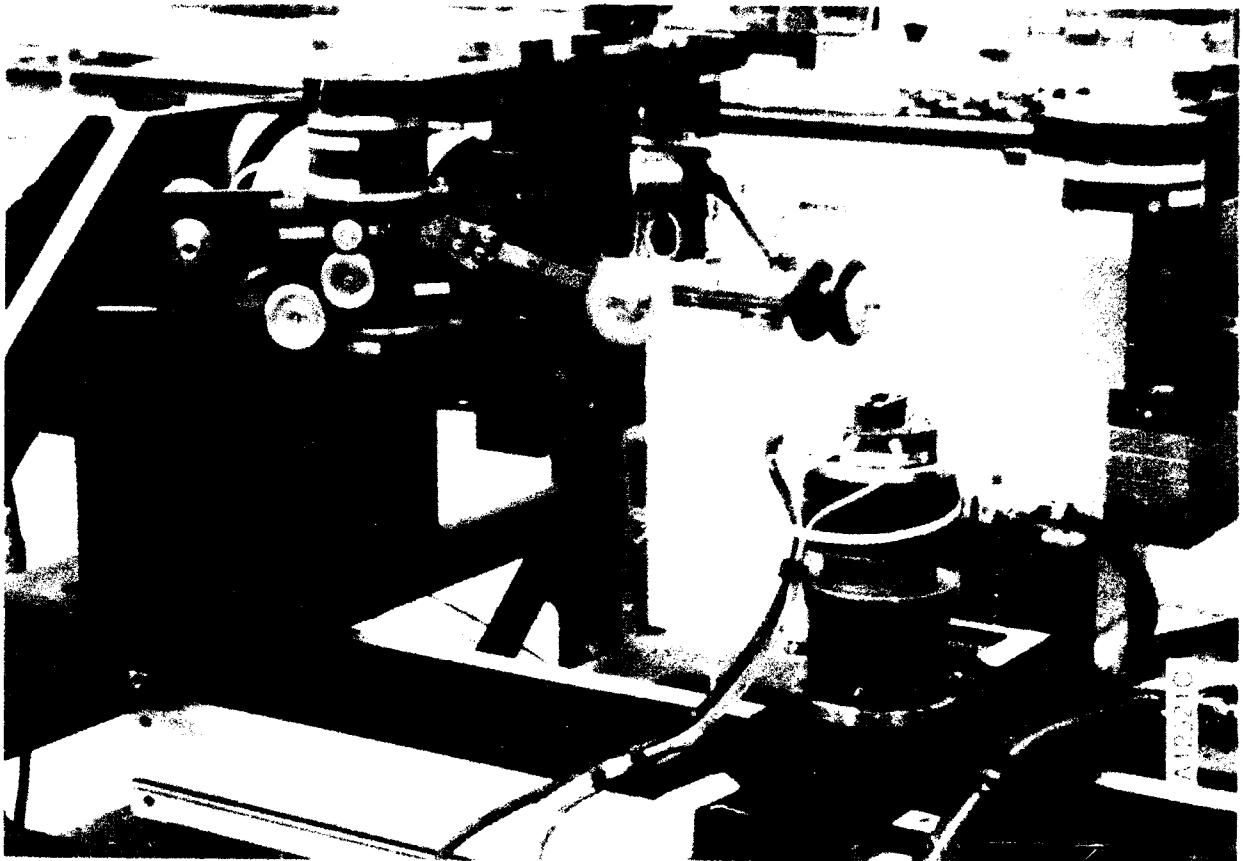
ACWS Payguide Removed from Holding Bracket Assembly
